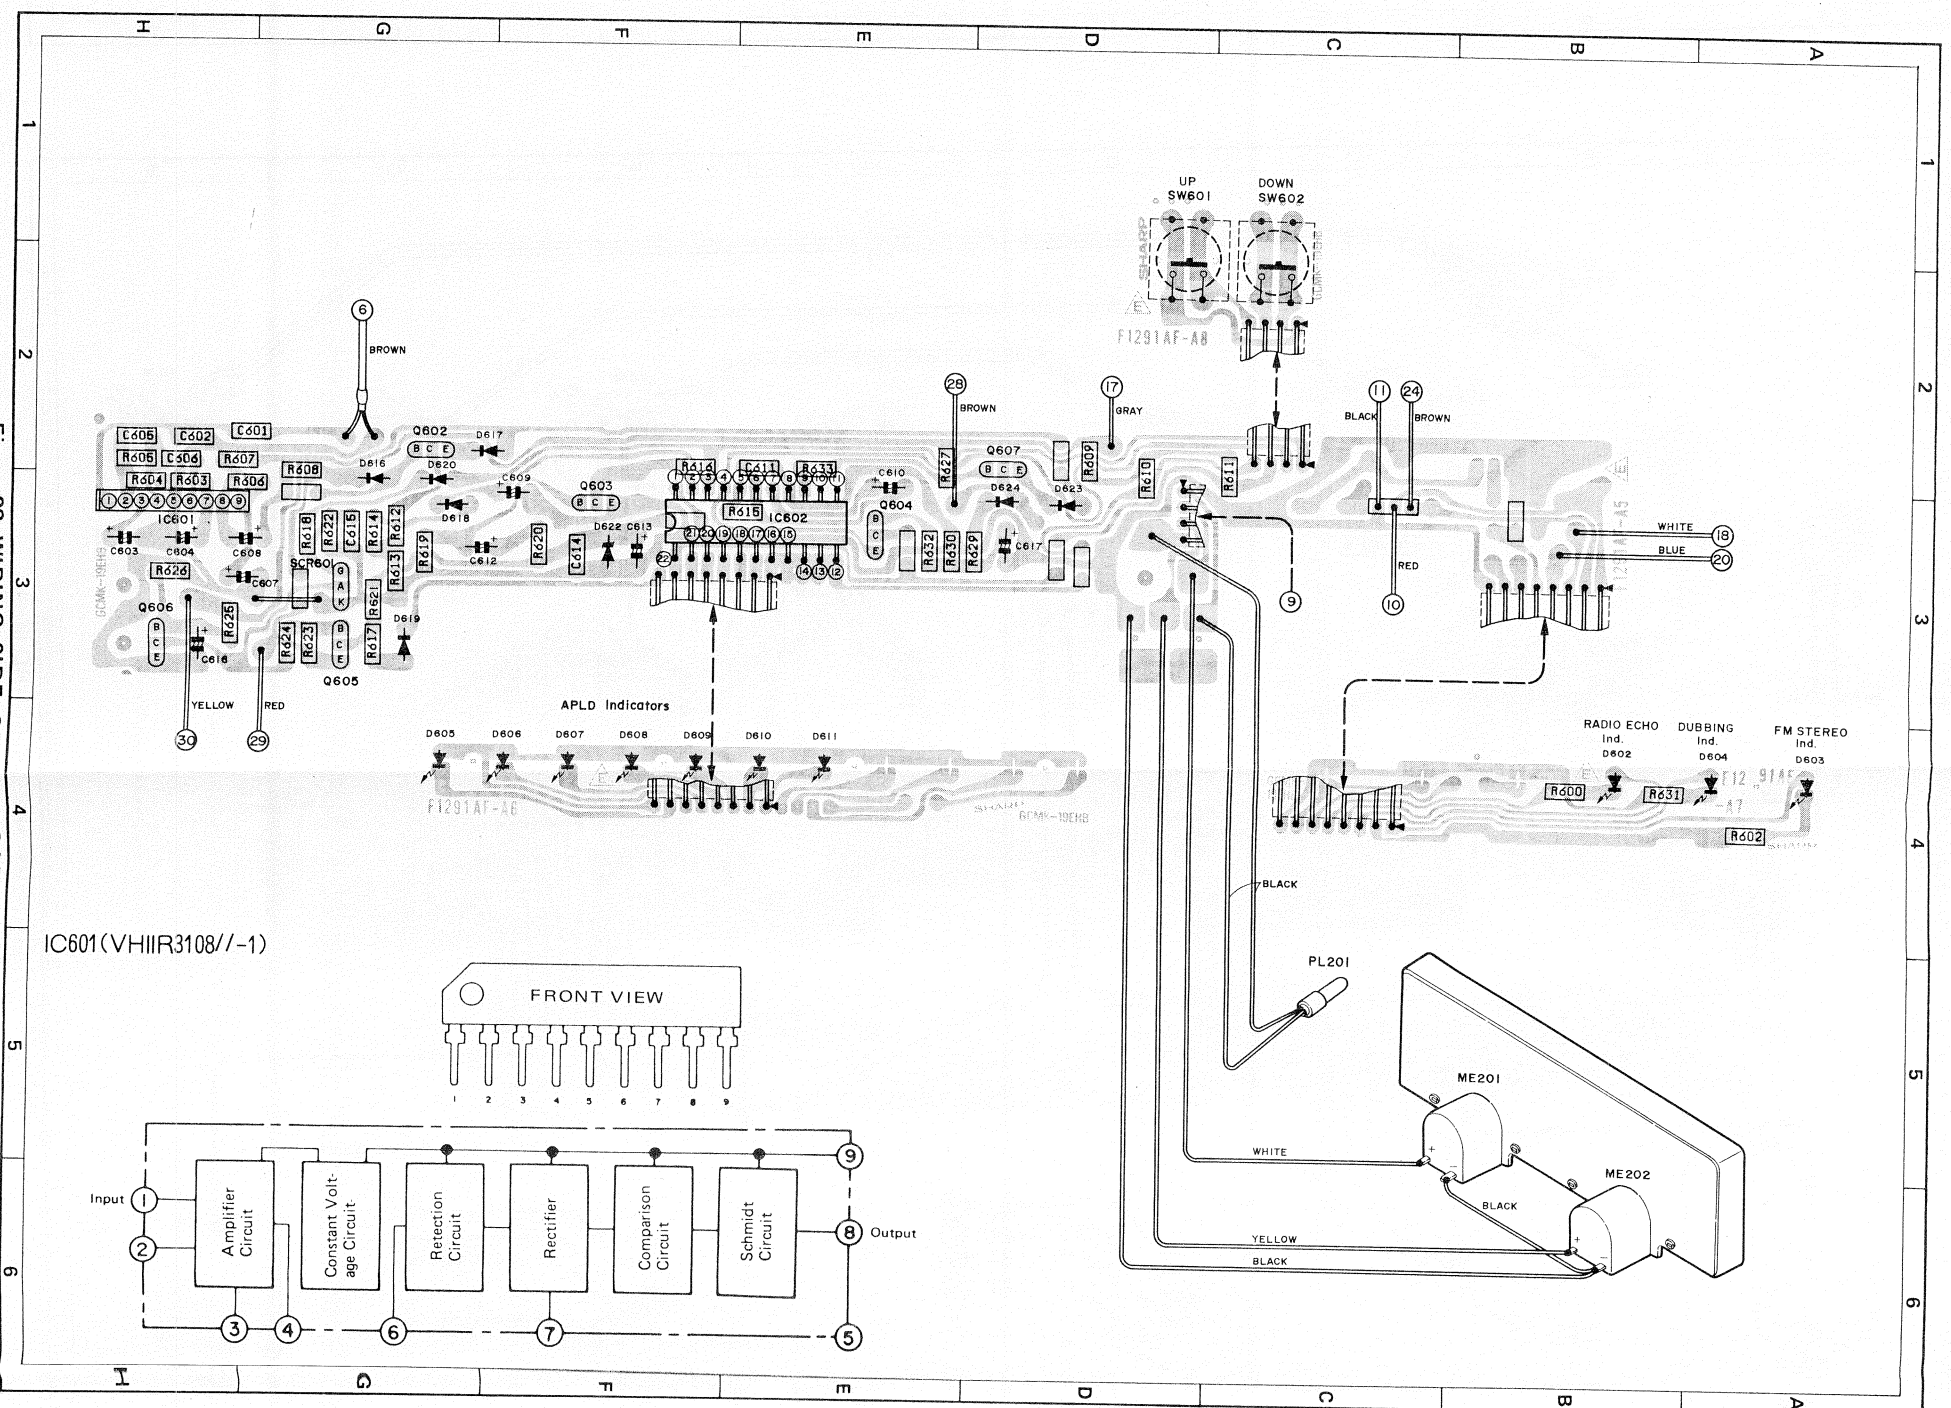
WIRING SIDE OF P.W. BOARD (4/6)
